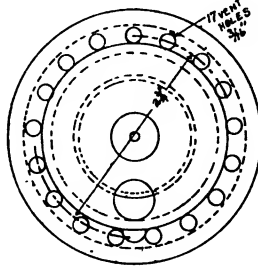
HOW TO MAKE A PORTABLE OIL BURNER
